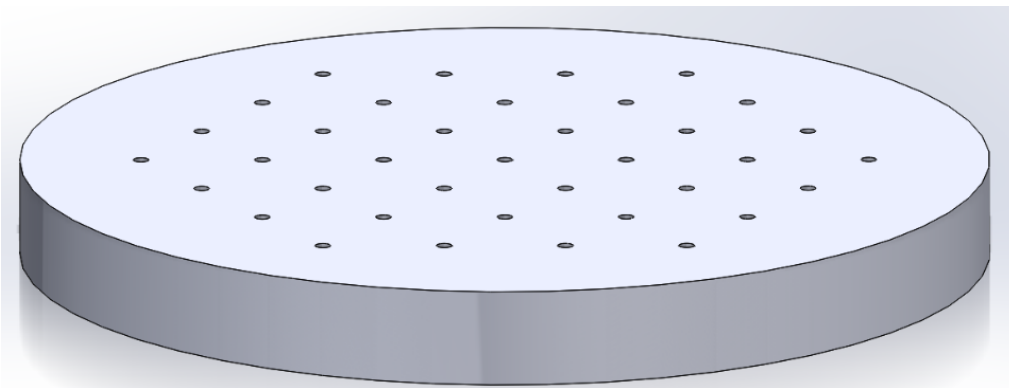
MIMO - Large Cavity AMM Panel - CAD
